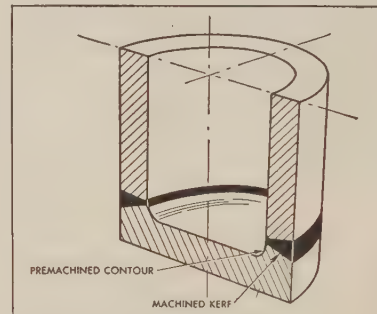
BOTTOM OF HYDRAULIC CYLINDER, TYPICAL OF THOSE USED IN HEAVY HYDRAULIC PRESSES
